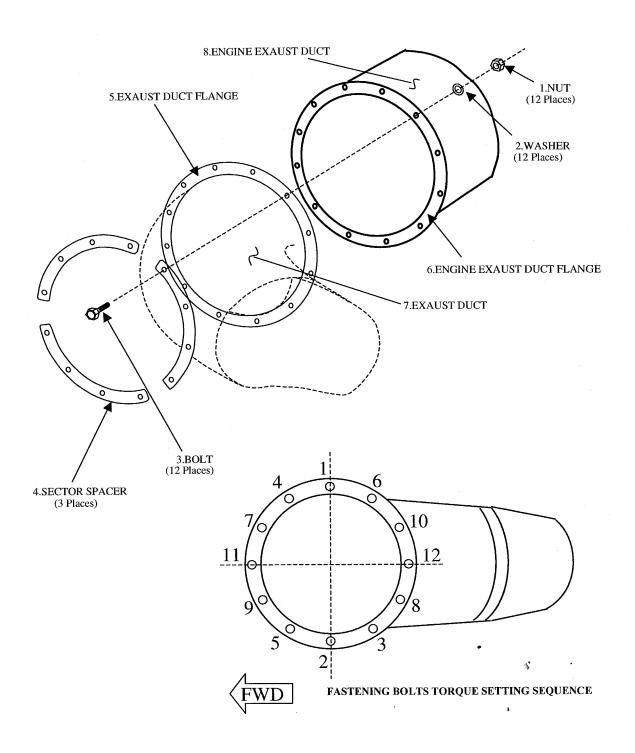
Exhaust Stacks - Removal/Installation (Sheet 2 of 2)
